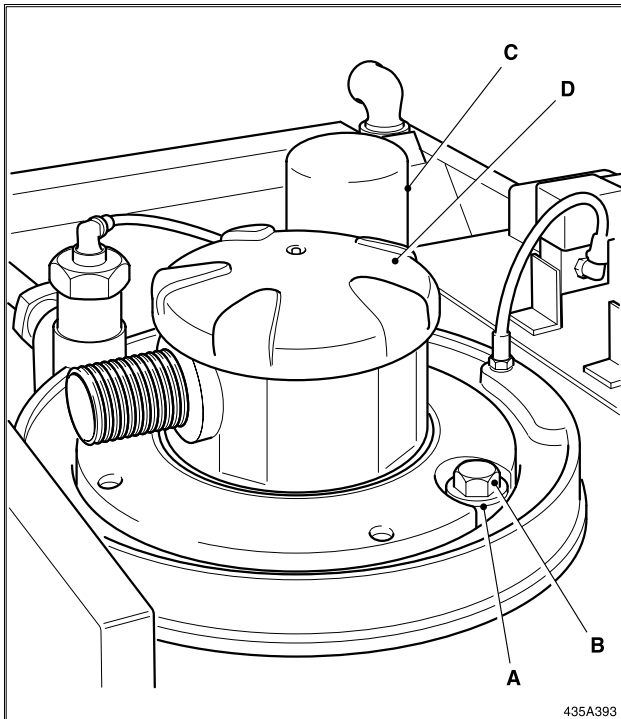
Oil Filler Plug, Air Filter and Separator Element Location
